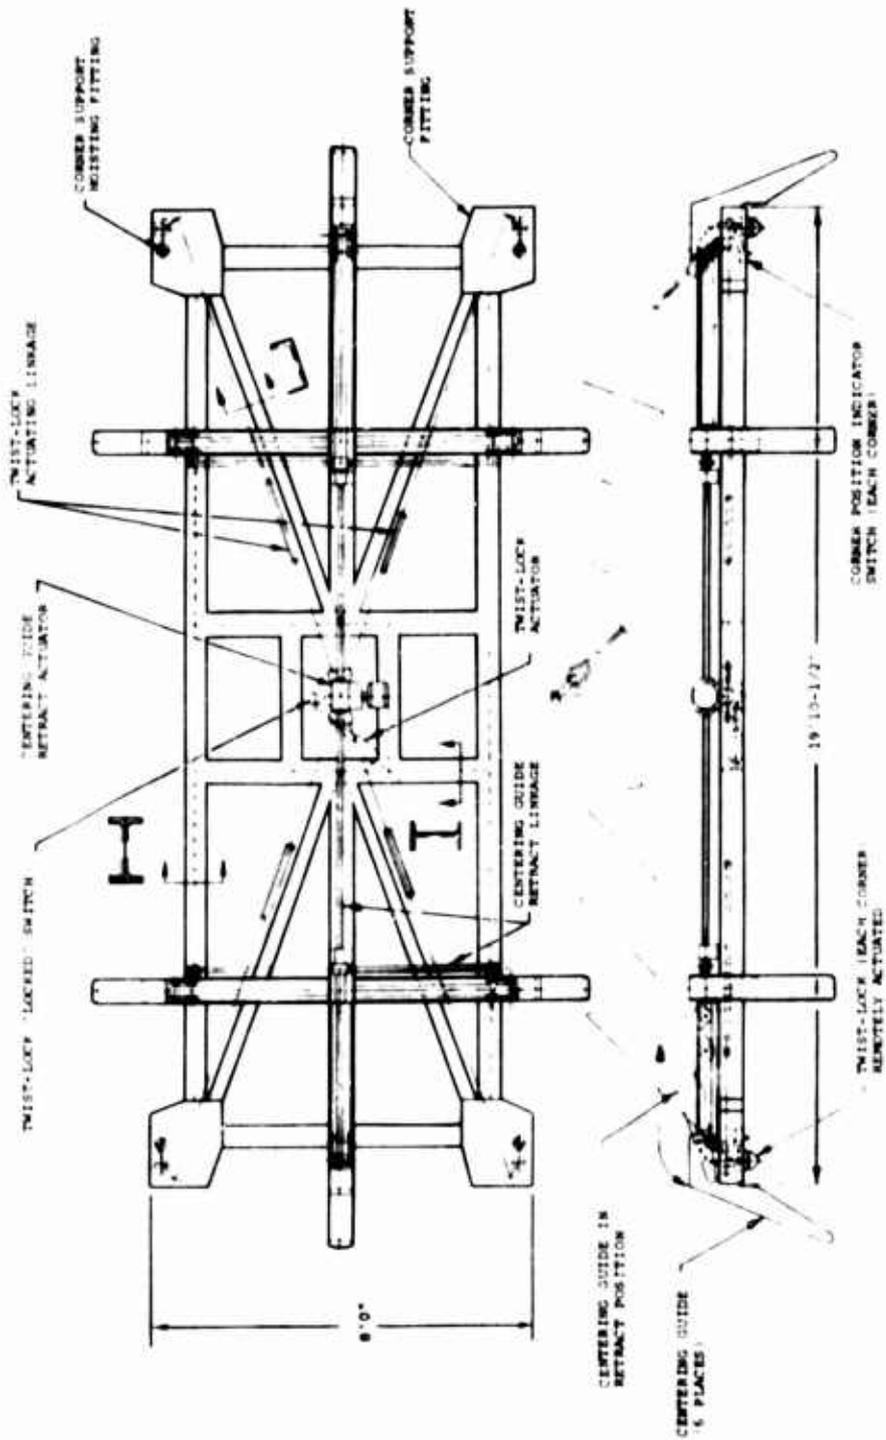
Container Handling Device - Rectangular Frame - Primary Structural Load Paths - Adapted to Use Side Guides.
